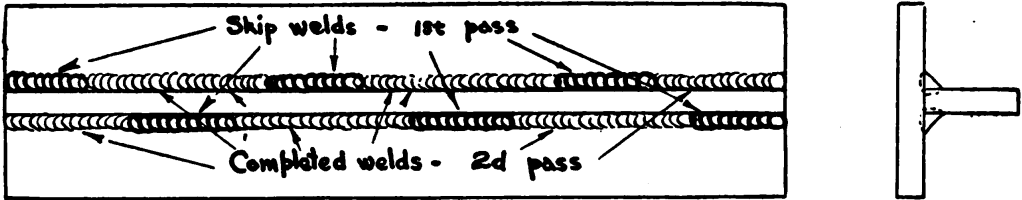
Welding procedure for reducing stresses in tee joints.
